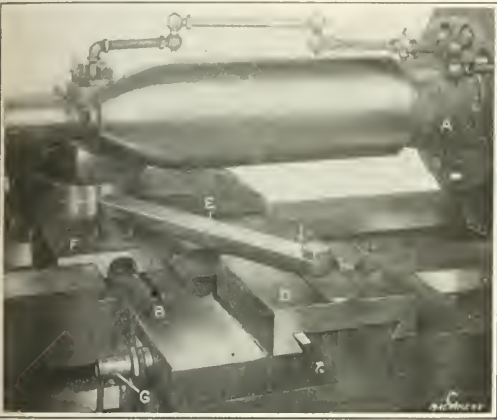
Turning Radius on Nose on a 24-inch Engine Lathe
